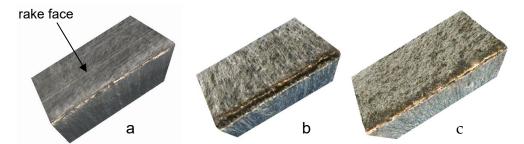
3D image of cutting edge of planer knife without the coating after sharpening (a), the cutting edge of planer knife without the coating (b), and with CrCN/CrN multilayer coating (c) after 6000 m of dry beech wood cutting [83].
